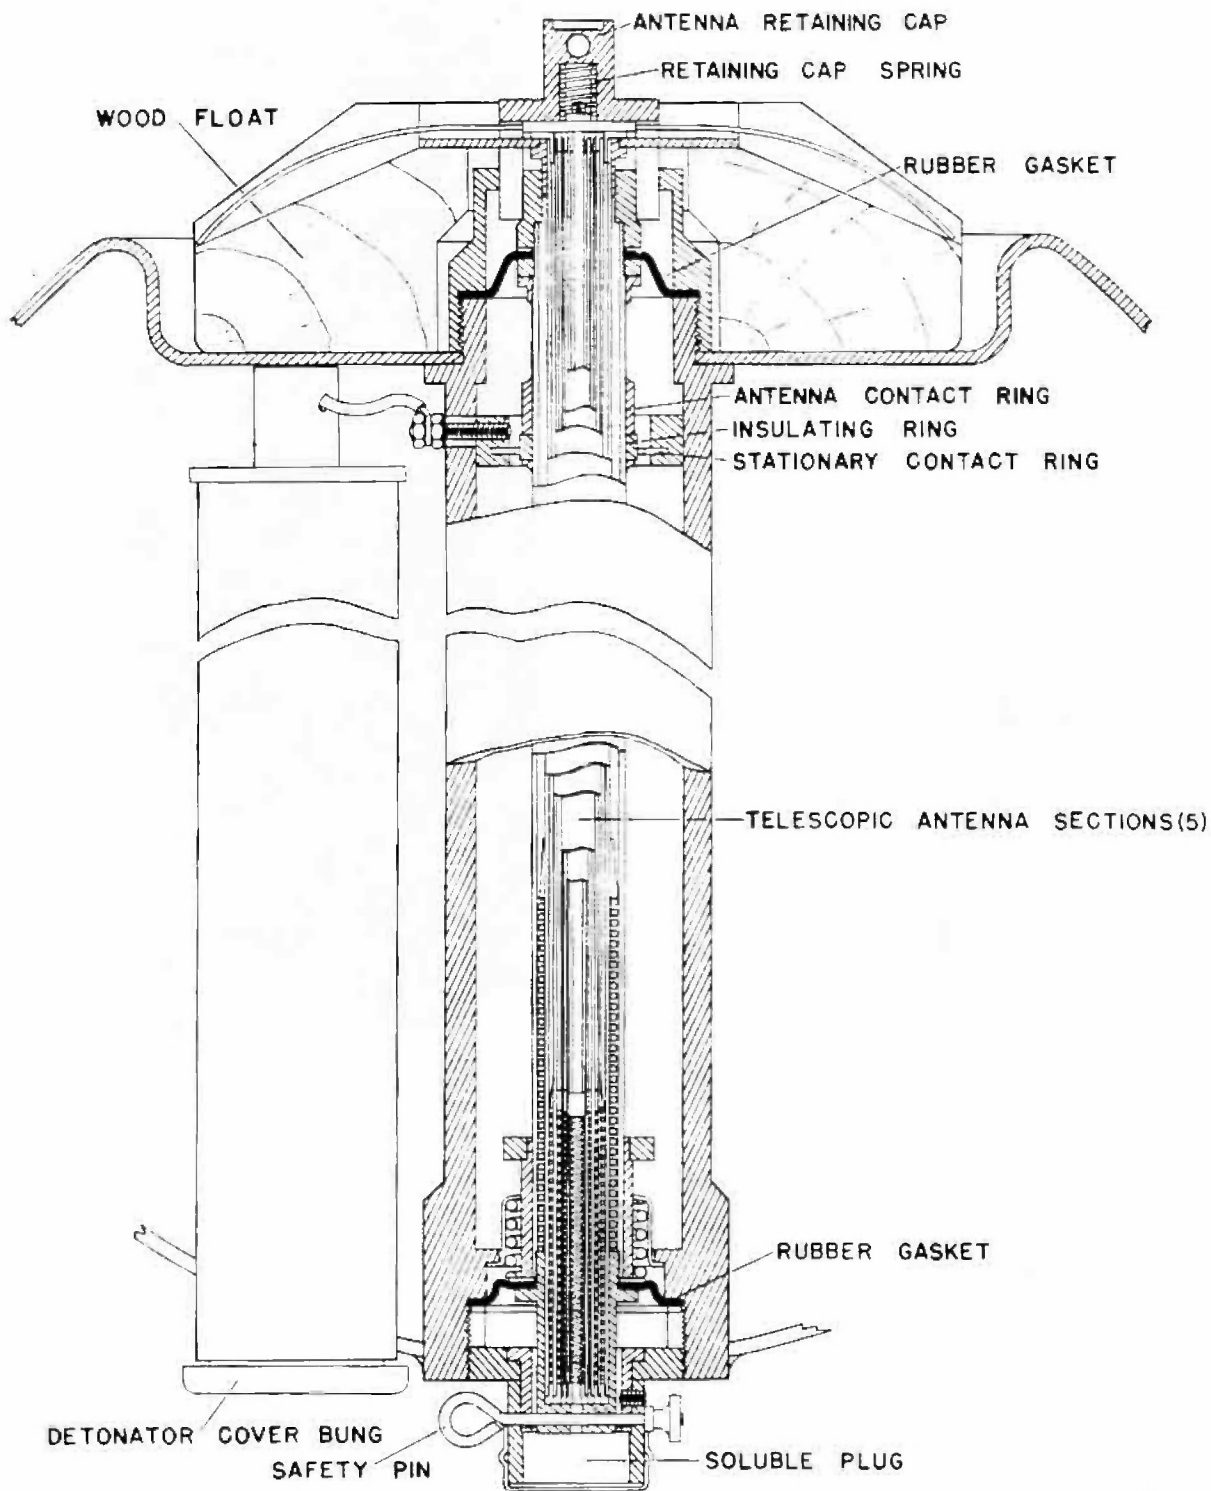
K TR M1 41 Detonator-Booster Cross Section
